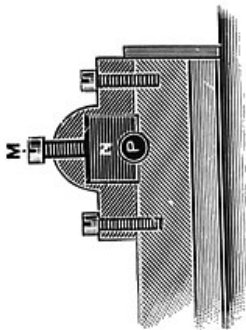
Sectional View of adjustable fittings of rack and pinion.
